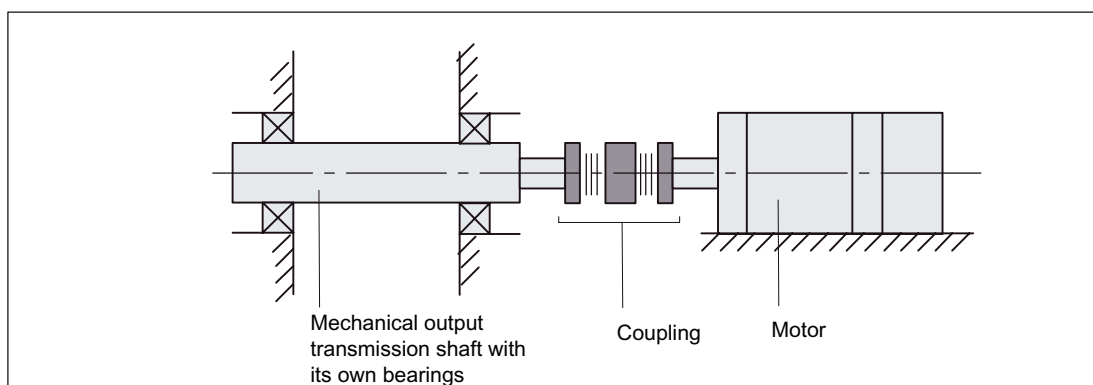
Mechanical output transmission shaft with its own bearings and compensating coupling
